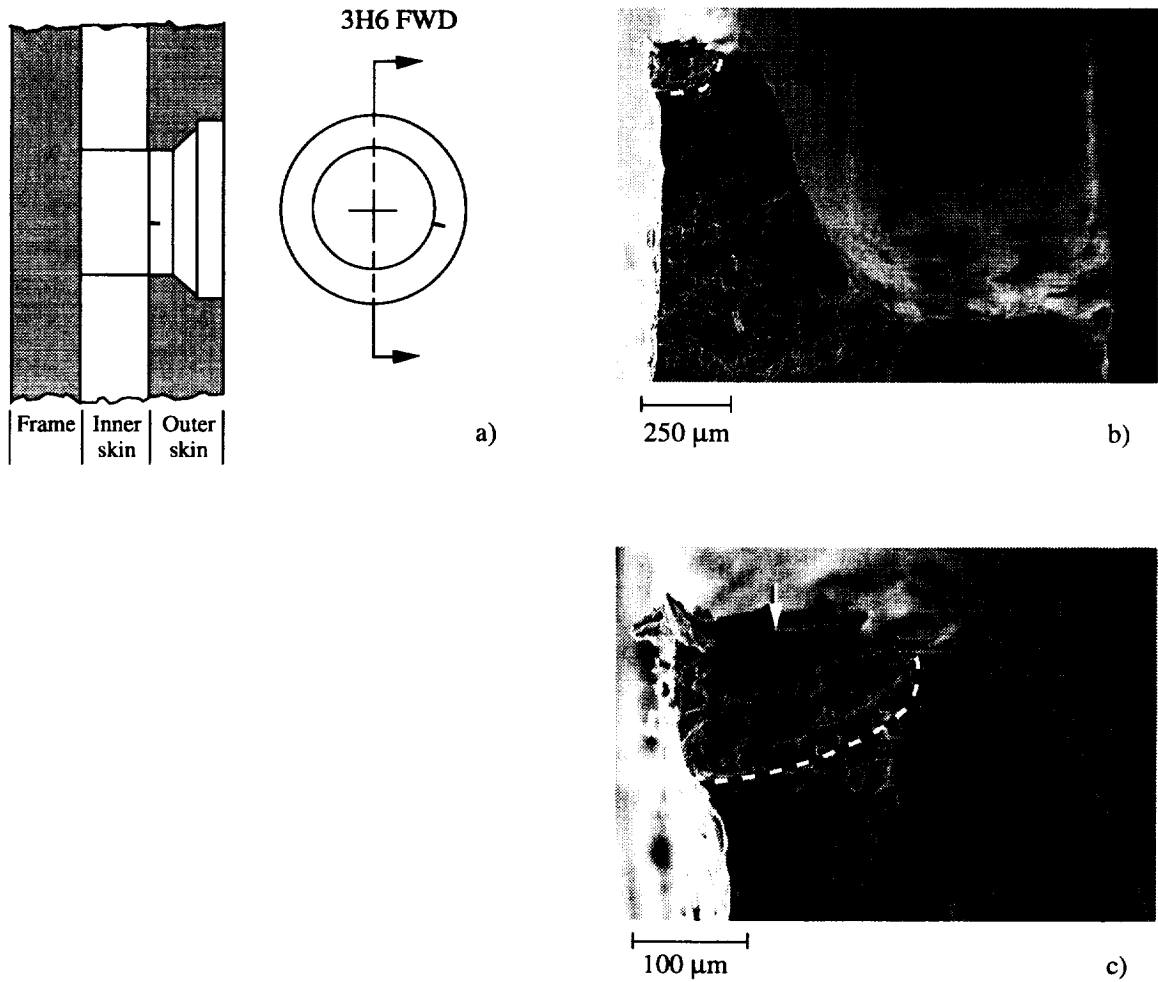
a) The schematic shows the rivet hole 3H6 configuration and the location of the outer skin fatigue crack oriented in the forward direction below the 3 o'clock position. b) The SEM micrograph shows the fatigue crack at the rivet hole shank region. The dashed line marks the fatigue crack front. c) The SEM micrograph shows the region of crack initiation (arrow) at the rivet hole shank. The dashed line marks the fatigue crack front.
